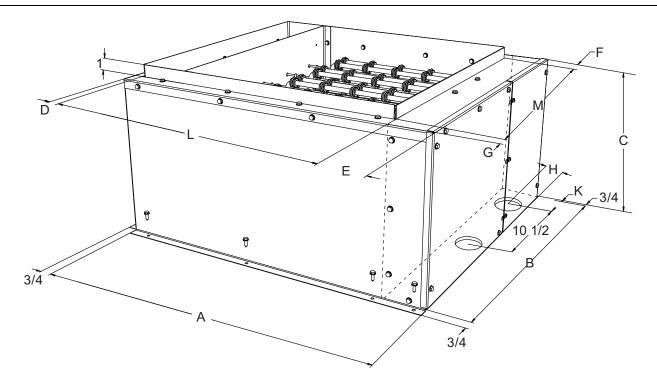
HEATER DIMENSIONS TABLE 6: HEATER DIMENSIONS
